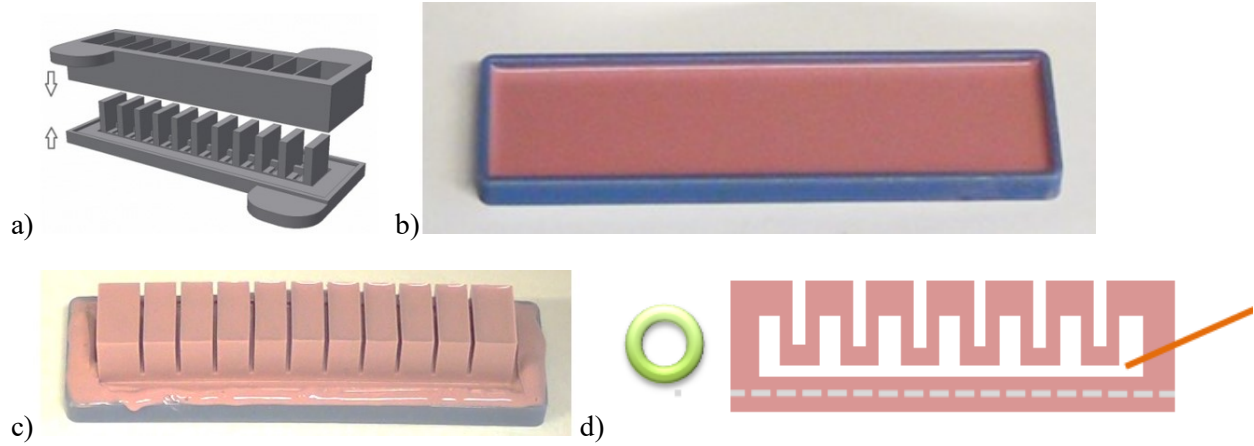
(a) mold to produce the upper part of the pneu-net [50] (b) mold to produce the bottom part of the pneu-net [50] (c) the cured upper part is dip into uncured bottom part [52] (d) direction to pierce the actuator for the tubing hole [53]
